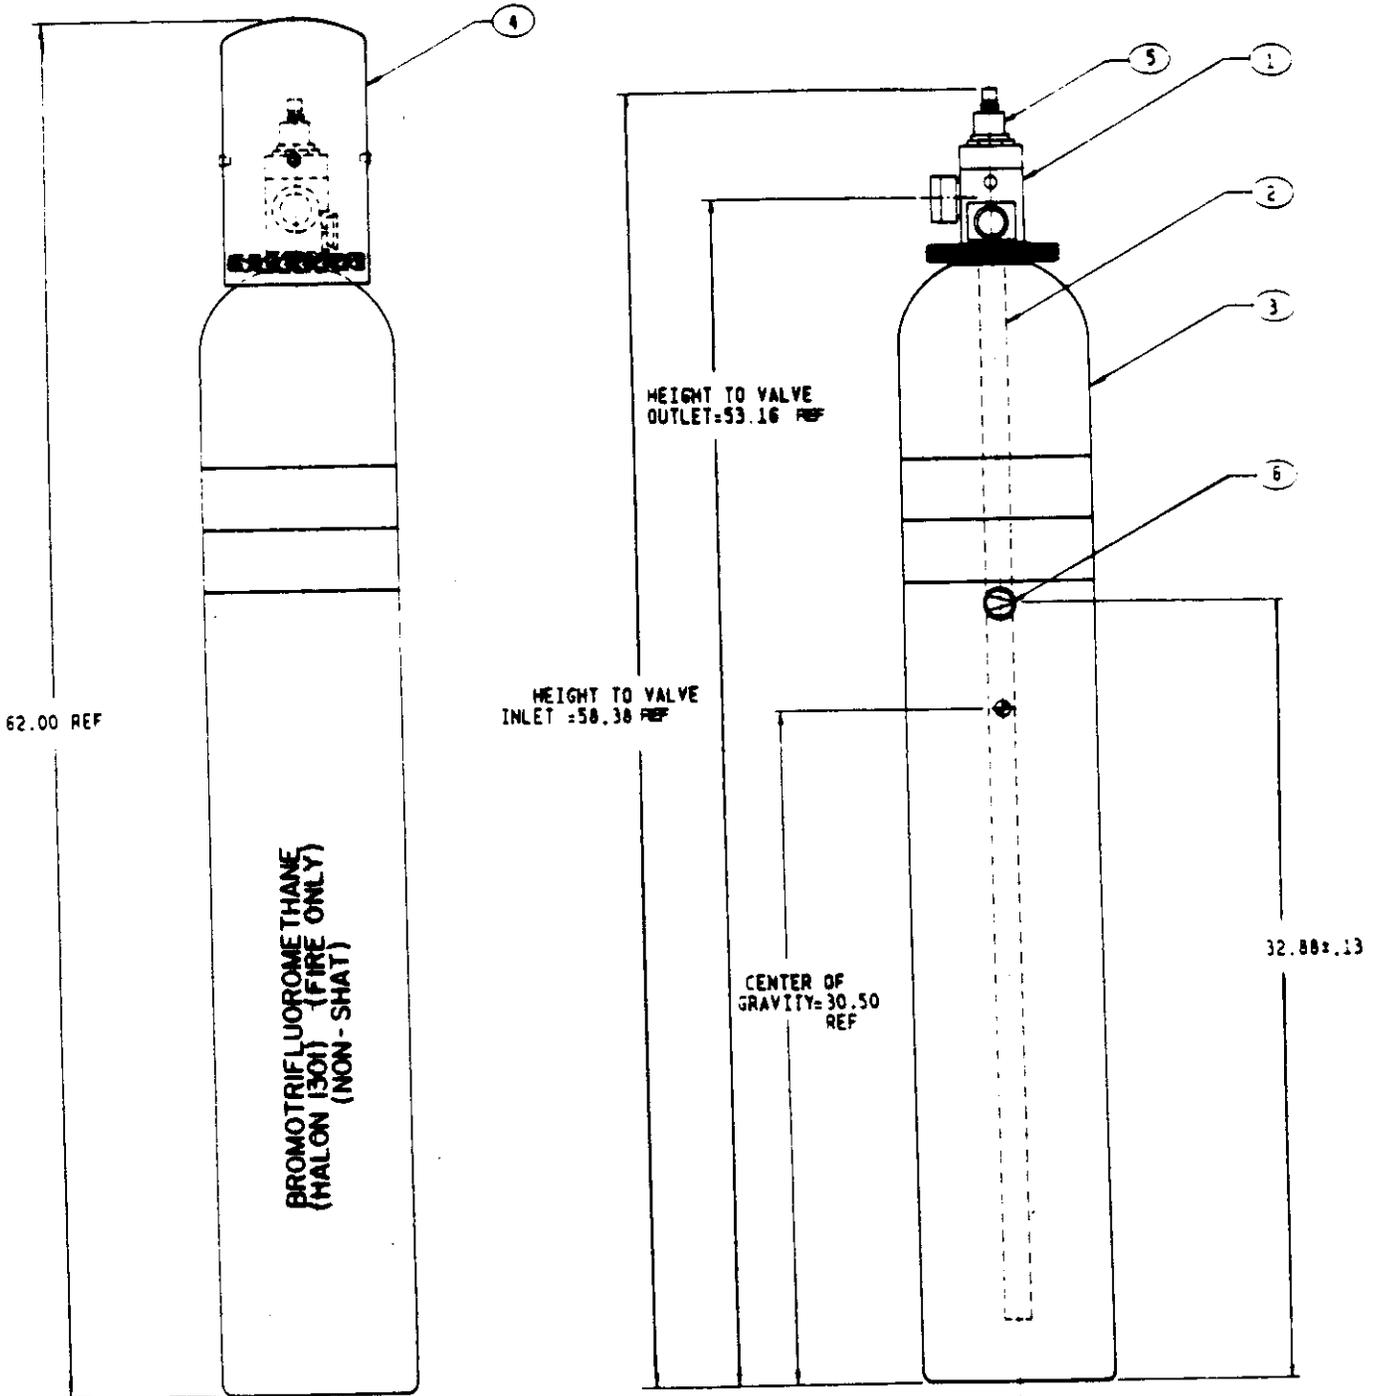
Cylinder Assembly, Halon 1301, 95 lb. Size 4, Class I
